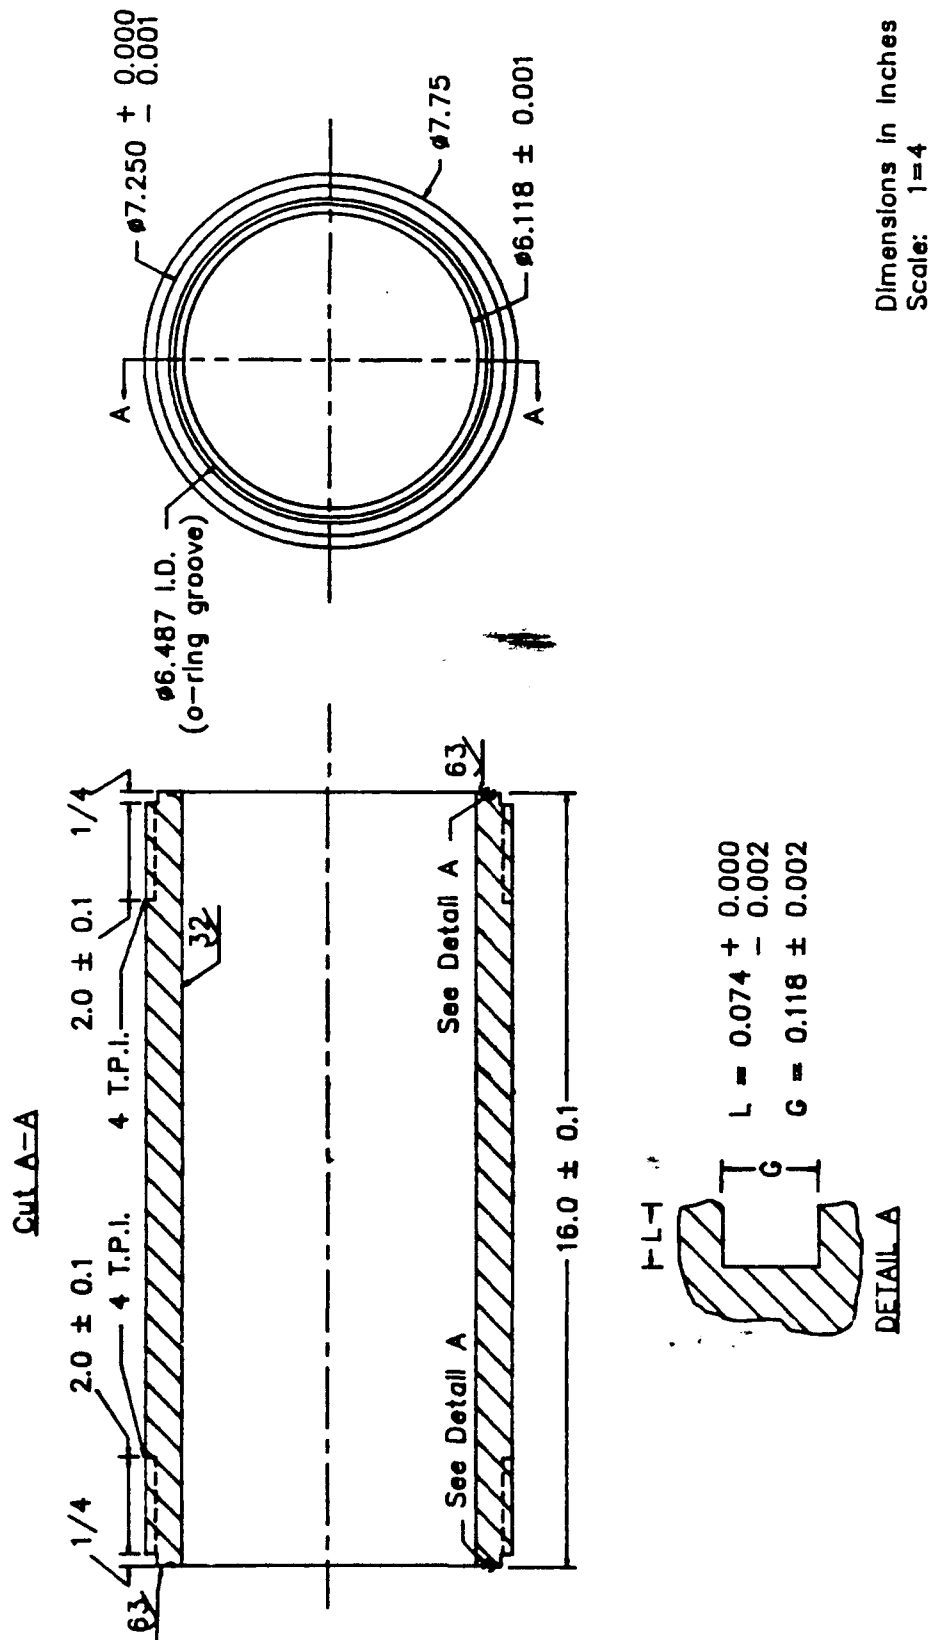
View of Barrel Section #1 (Typical Barrel Section).
